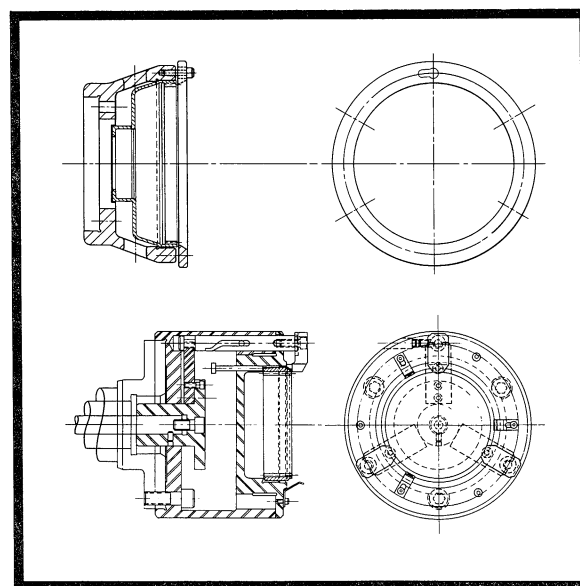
Typical work holding fixtures for shaving internal gears on a rotary gear shaver.
